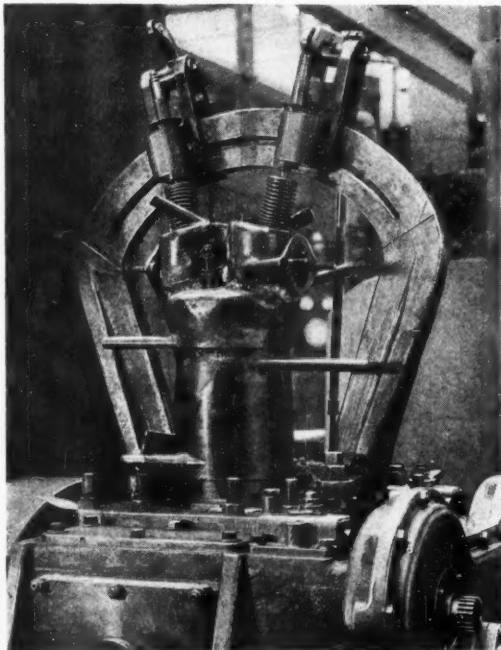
ADJUSTABLE VALVE-GEAR YOKE ON UNIVERSAL CRANK-CASE
